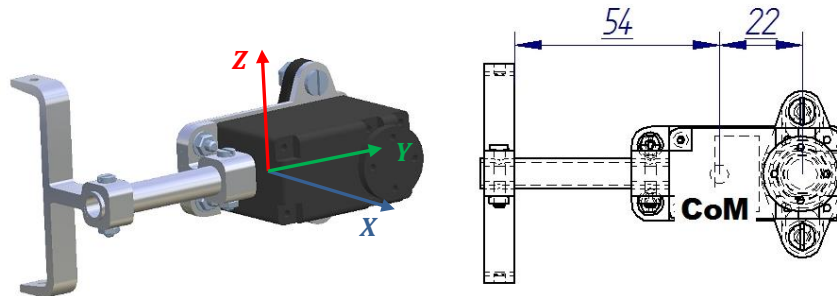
CoM and dimensions (in mm) of the shoulder roll structure.
